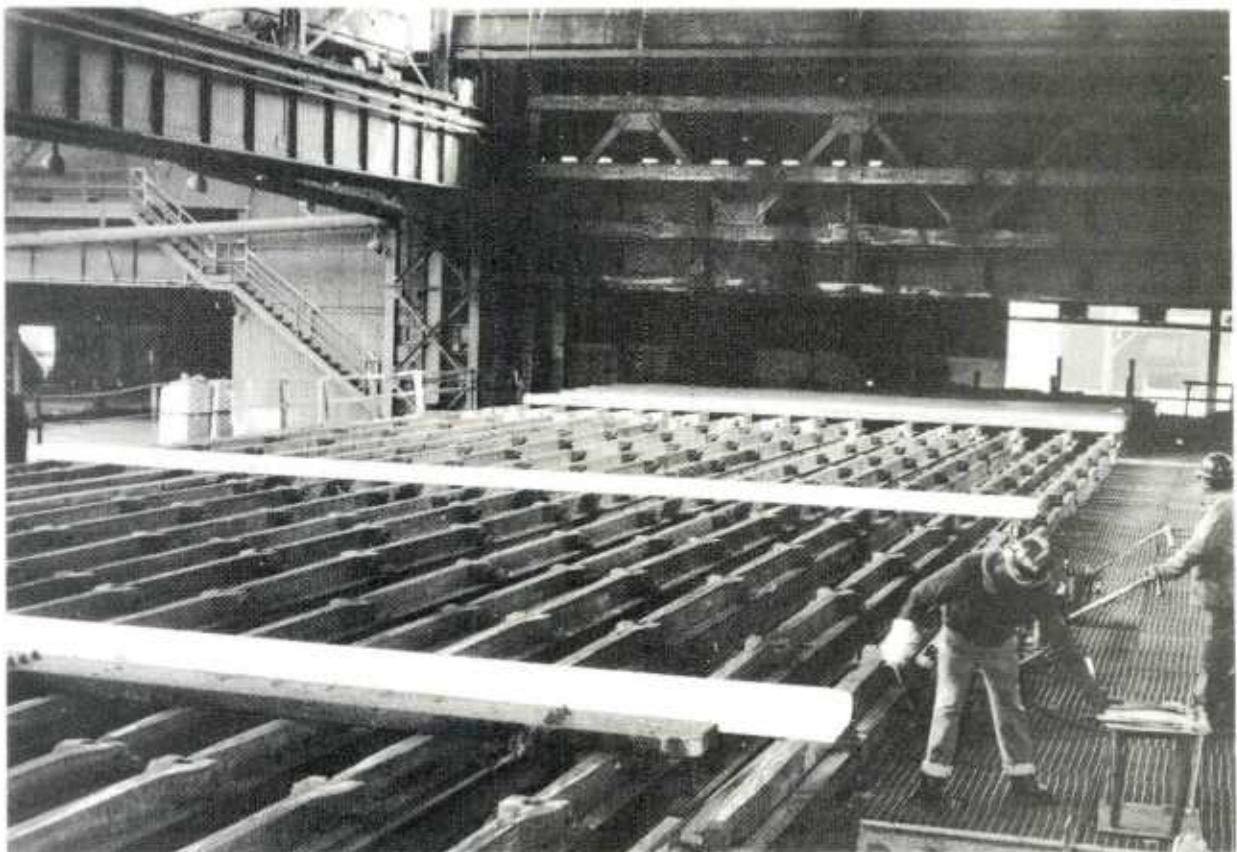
21 inch Cooling Bed Which Air Cools Billets Prior to Final Slow Cool in Either Bung Furnace or Cooling Boxes
